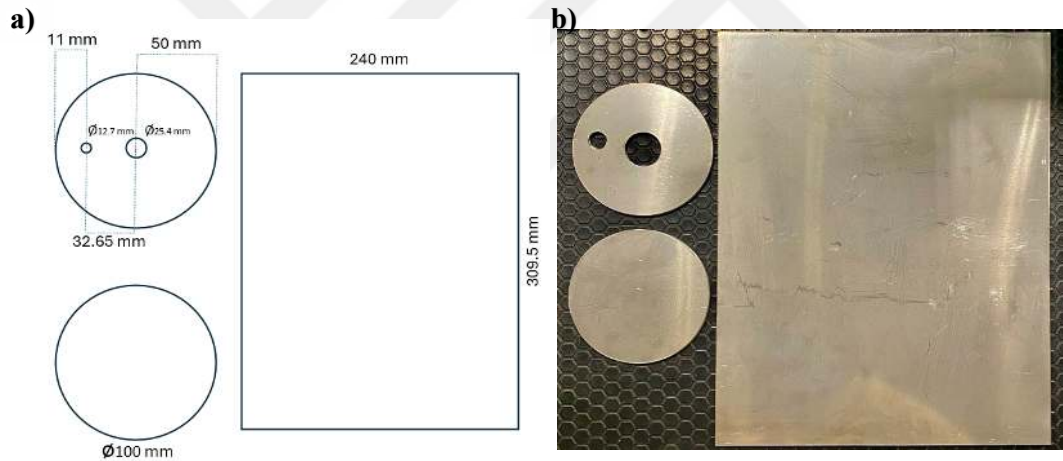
a) Specified dimensions for the sheet layouts; b) sheets cut to these dimensions using laser cutting
